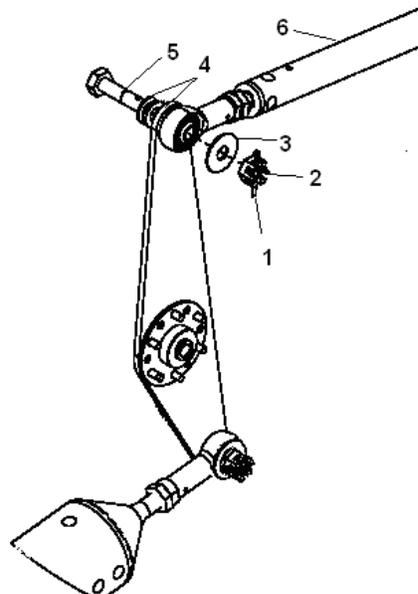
Aft Pushrod to Aft Idler Plate Connection
